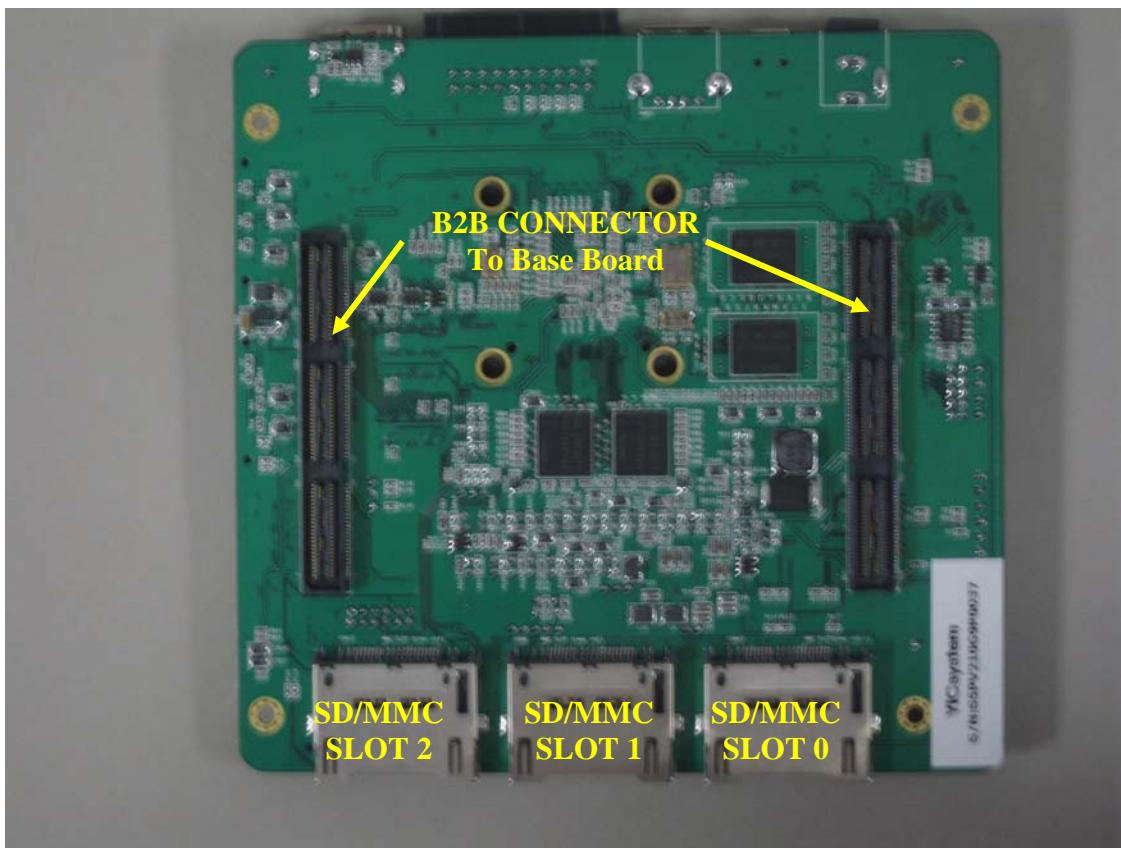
S5PV210 CPU BOARD BOTTOM VIEW
